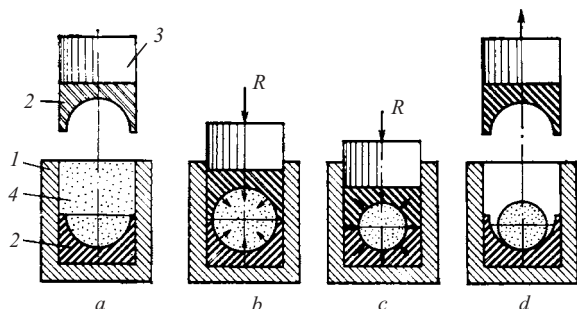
Scheme of operation of a mold for quasi-isostatic molding of milling balls: *a*) charging of molding powder or a premolded spherical intermediate piece; *b*) start of molding; *c*) end of molding; *d*) return of the punch and the molding buffer to the initial state.
